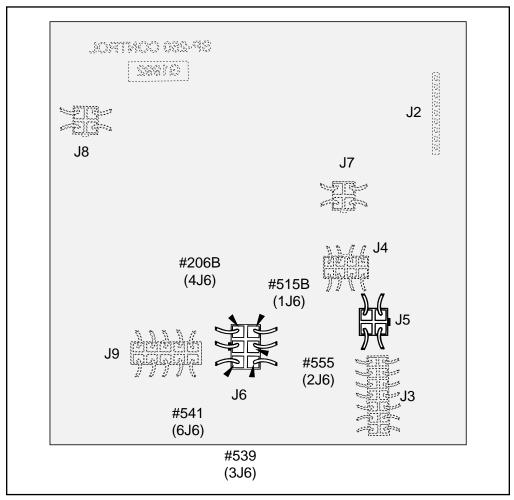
B - Plug J6 Location on G1992 PC Control Board (Code 9402 only.) NOTE: Plugs J5 and J6 are on the inboard non-component side of the Control Board.
